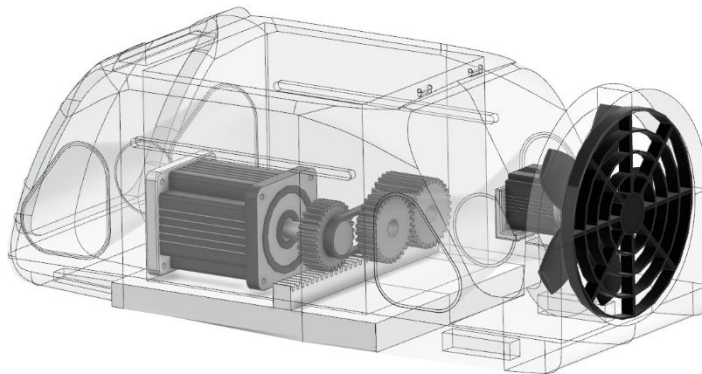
BAY DOOR MECHANISM SUB-ASSEMBLY
